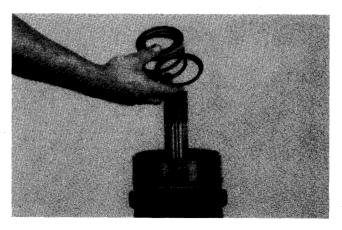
Position the inner return spring retainer, the return spring and the outer spring retainer on clutch shaft.
